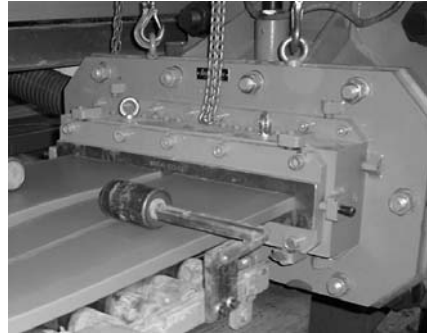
Combination pressure head and die assembly for extruding roof-tile slugs; 2 side-by-side columns
